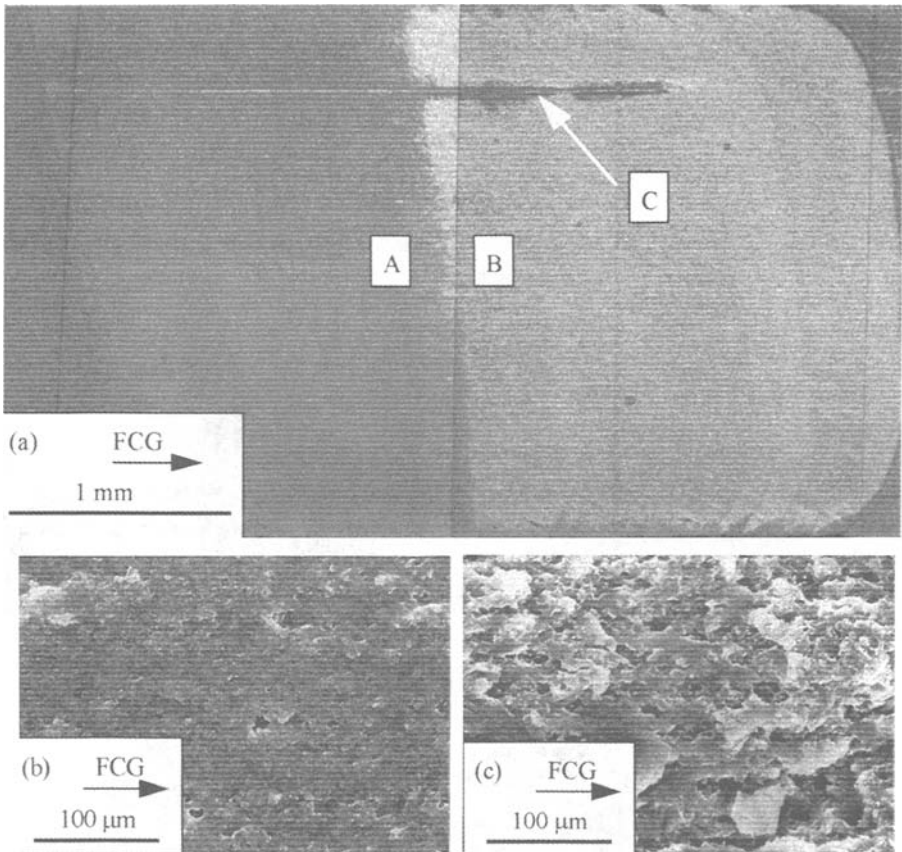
SEM fractographs of alloy 8009 fatigue crack surfaces produced by a constant- $K_{max} = 5.5 \text{ MPa}\sqrt{\text{m}}$ threshold test; (a) the entire fatigue crack surface, (b) high magnification fractograph of region A in Figure 9a, and (c) high magnification fractograph of region B in Figure 9a. Figures 9b and 9c correspond to fatigue crack growth rates just before and just after point A in Figure 3. (Recall threshold tests performed with decreasing ΔK .)
